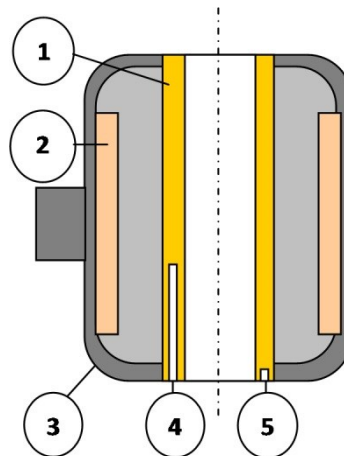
Schematic representation of the casting assembly to produce ingots under different conditions: 1) Cu mould, 2) electromagnetic coils - 13 Gauss, 3) electric motor, 4) water drain and 5) water inlet [18].
